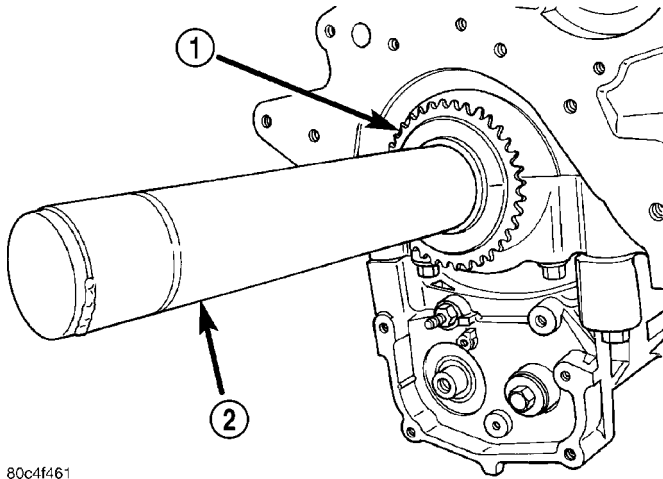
Balance Shaft Sprocket Alignment to Crankshaft
